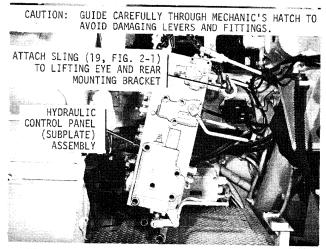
Hydraulic control panel (subplate) assembly-removal and installation (Sheet 2 of 3).
